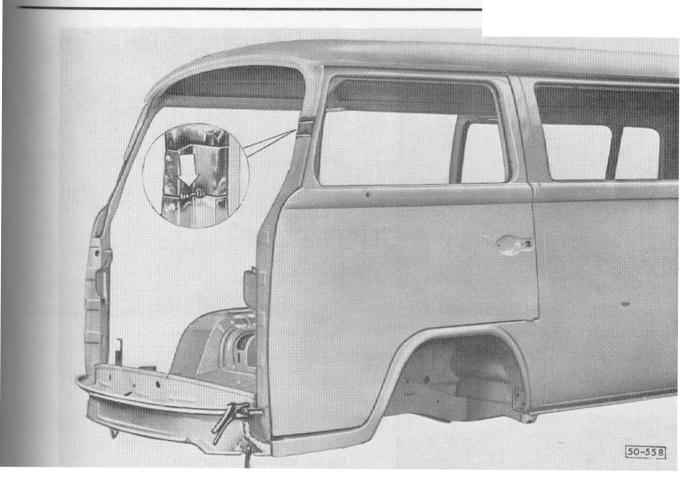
Tack weld hinge pillar — install door, check the gap all round and if necessary correct the positioning of the pillar.
